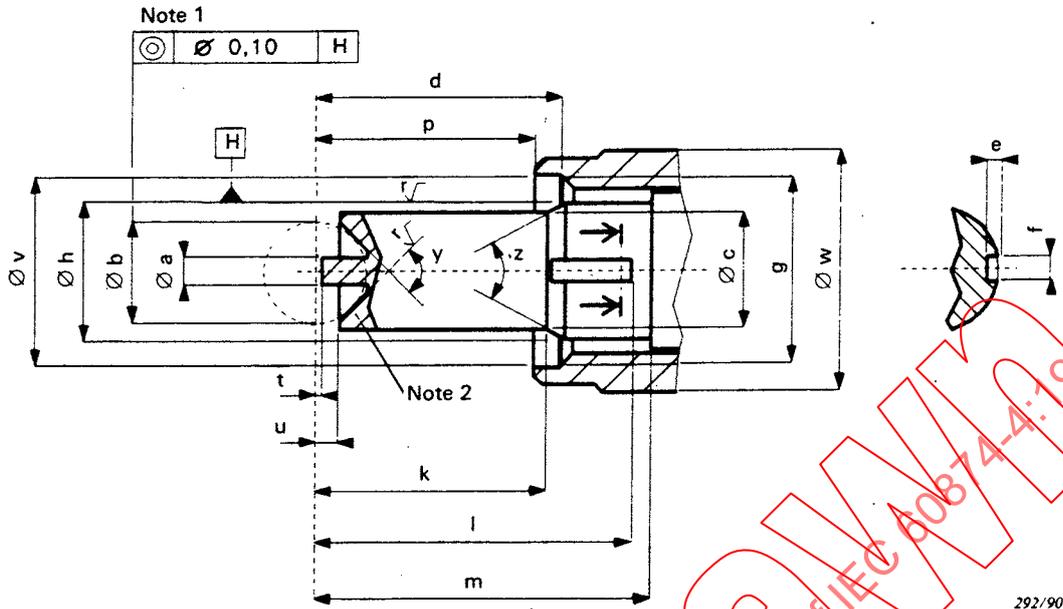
Interface drawing (for dimensions and notes see tables A3a and A3b)
